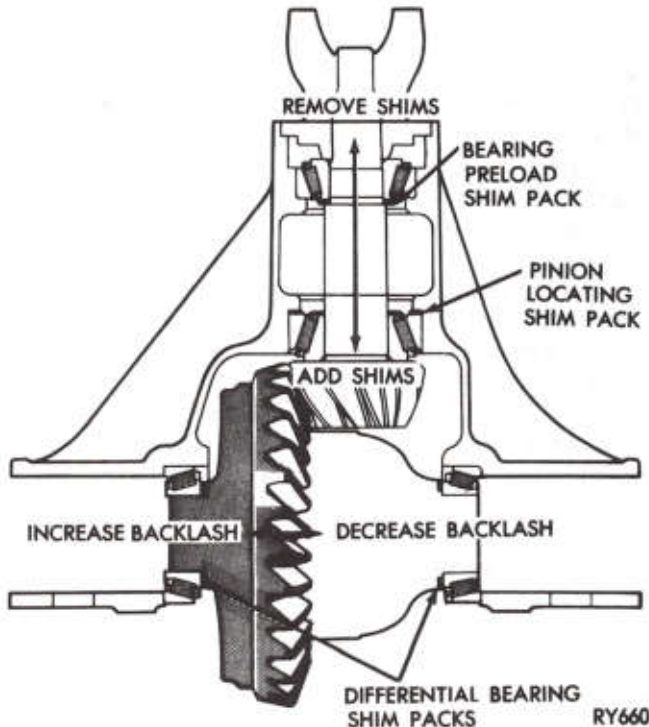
Use of Shims to Adjust Gear Tooth Contact
